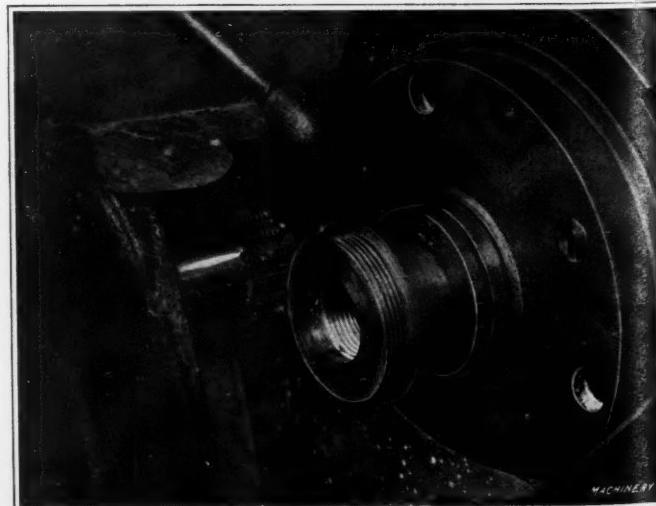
Typical Example of Work done on Multiple-cutter Type of Machine
